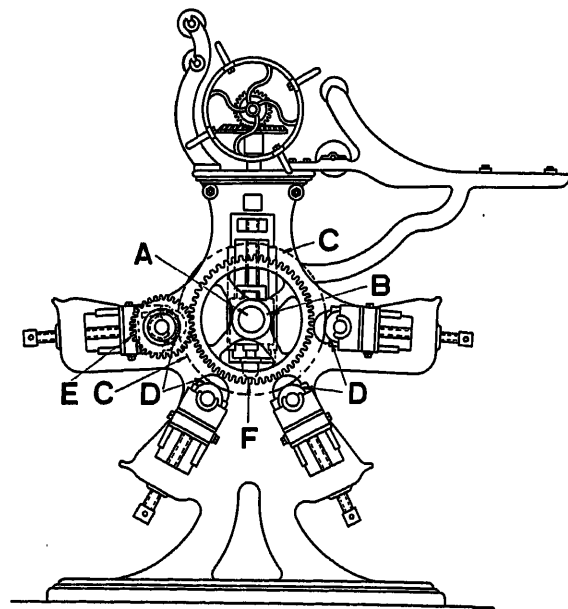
Drawing of a four colour machine. A. Main shaft. B. Bearing in the frame. C. Press rollers. D. Printing rollers. E, F. Gear drive.
